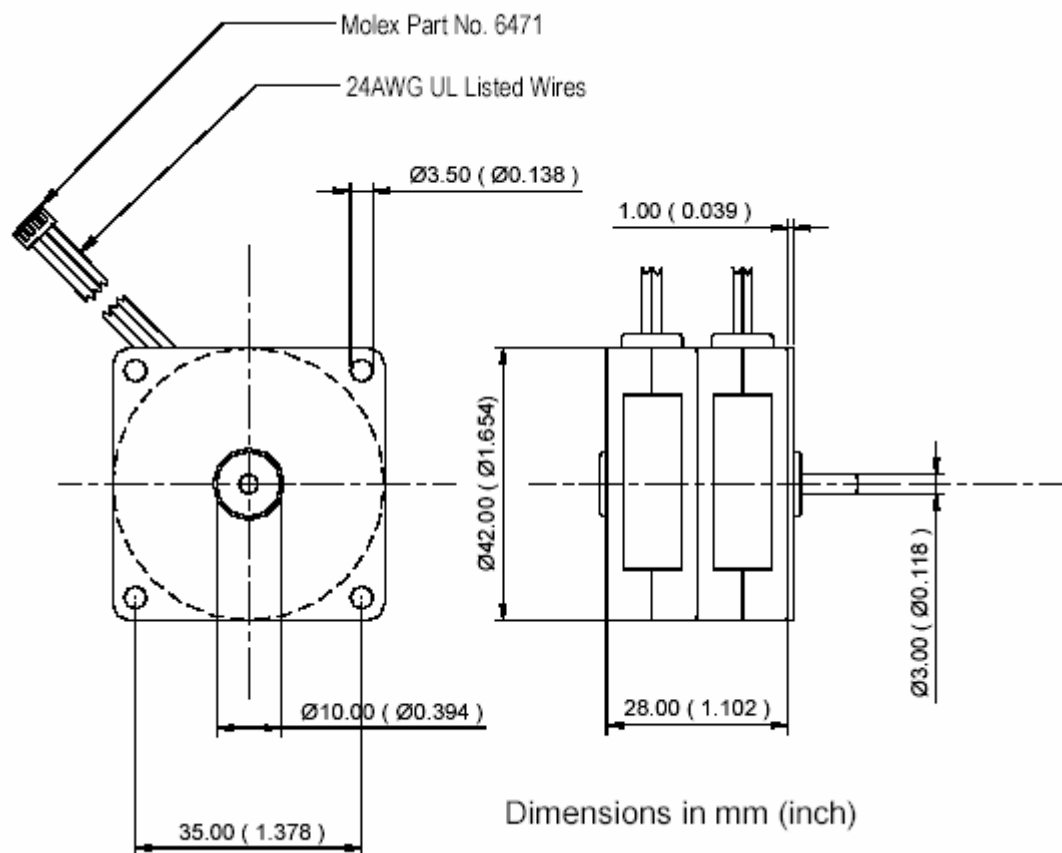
Dimensional specifications of stepper motor D-48-42-B28
